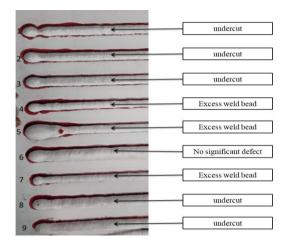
Identified weld defectives of nine beads using LPT
